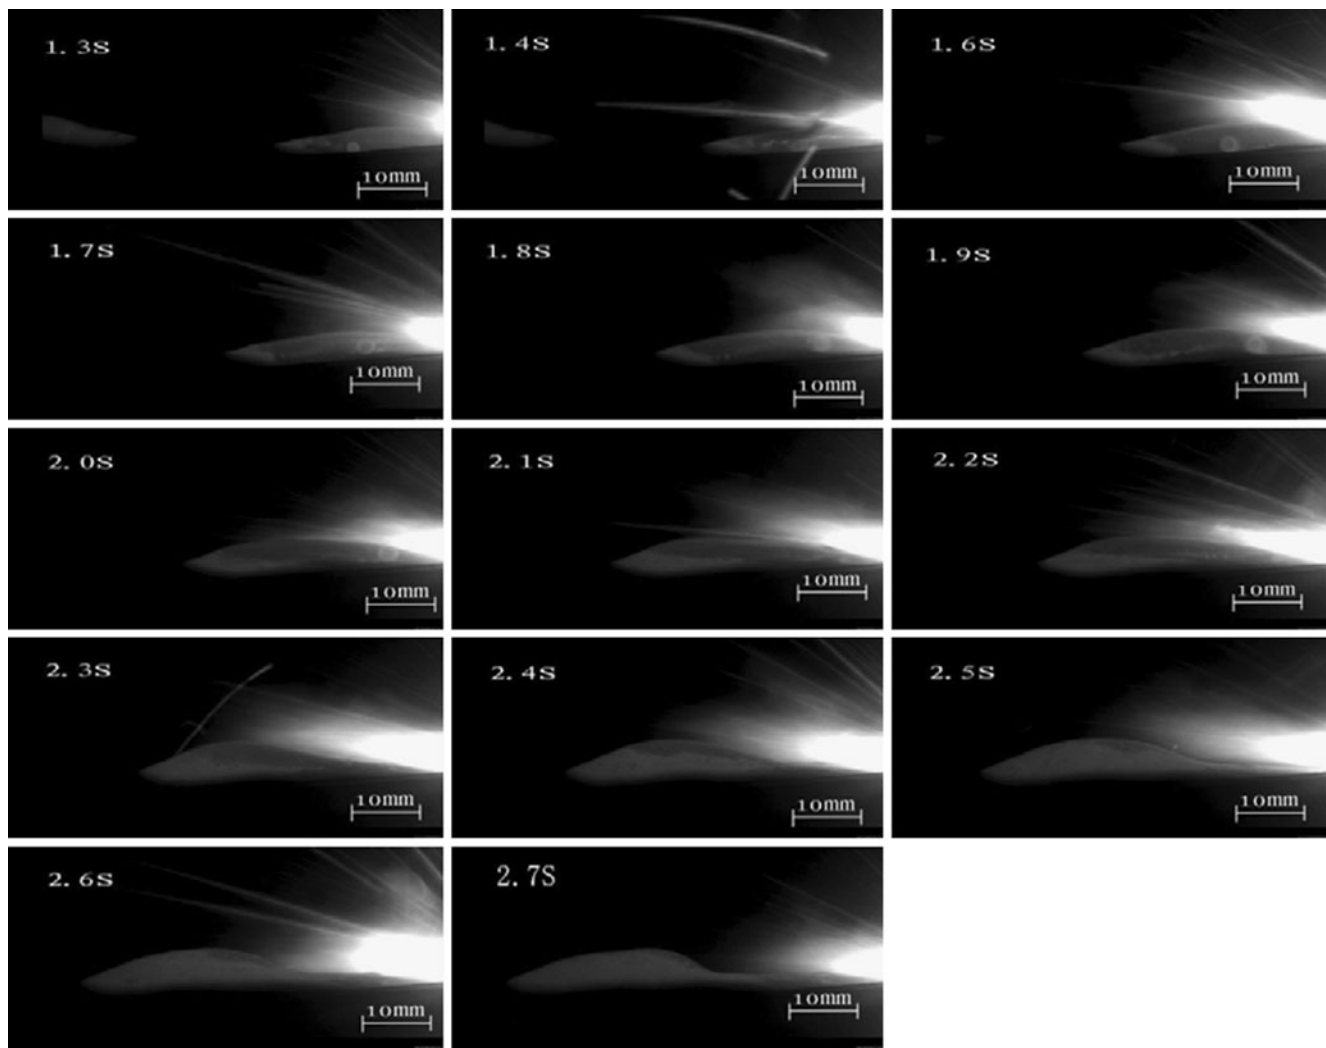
The weld bead morphology in GMAW ( $\nu_w=1.30$  m/min,  $I=321$  A,  $U=30$  V)
